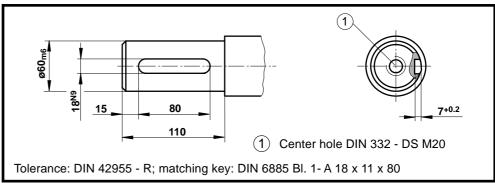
Main spindle motor ADF 160 - output shaft with key
